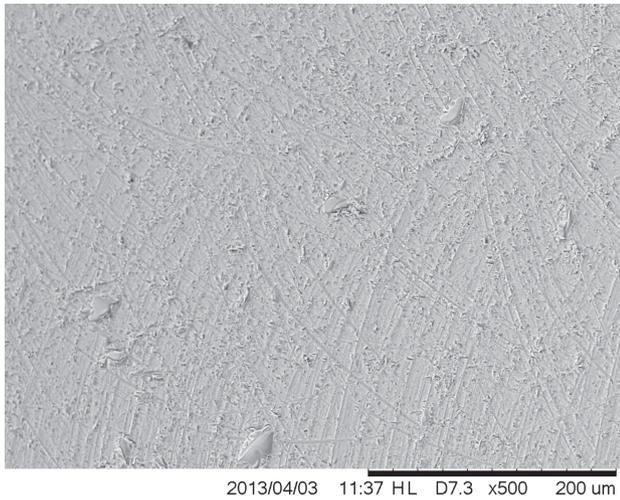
Die surface after lapping with 30 µm lapping film, showing amorphous hillocks formed by bonding of swarf to the die surface
